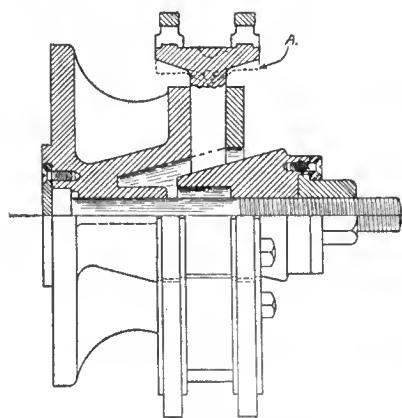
IMPROVED DESIGN OF EXPANDING CHUCK.
